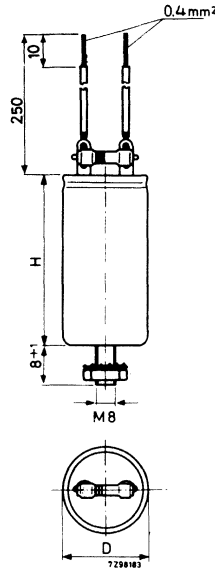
Version with soldering tags, provided with leads and discharge resistor
